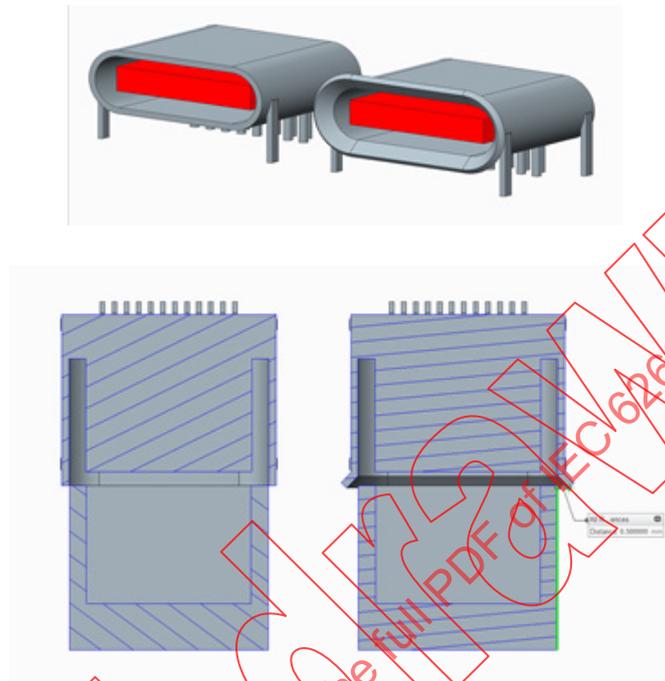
USB Type-C Cable Receptacle Flange Example
